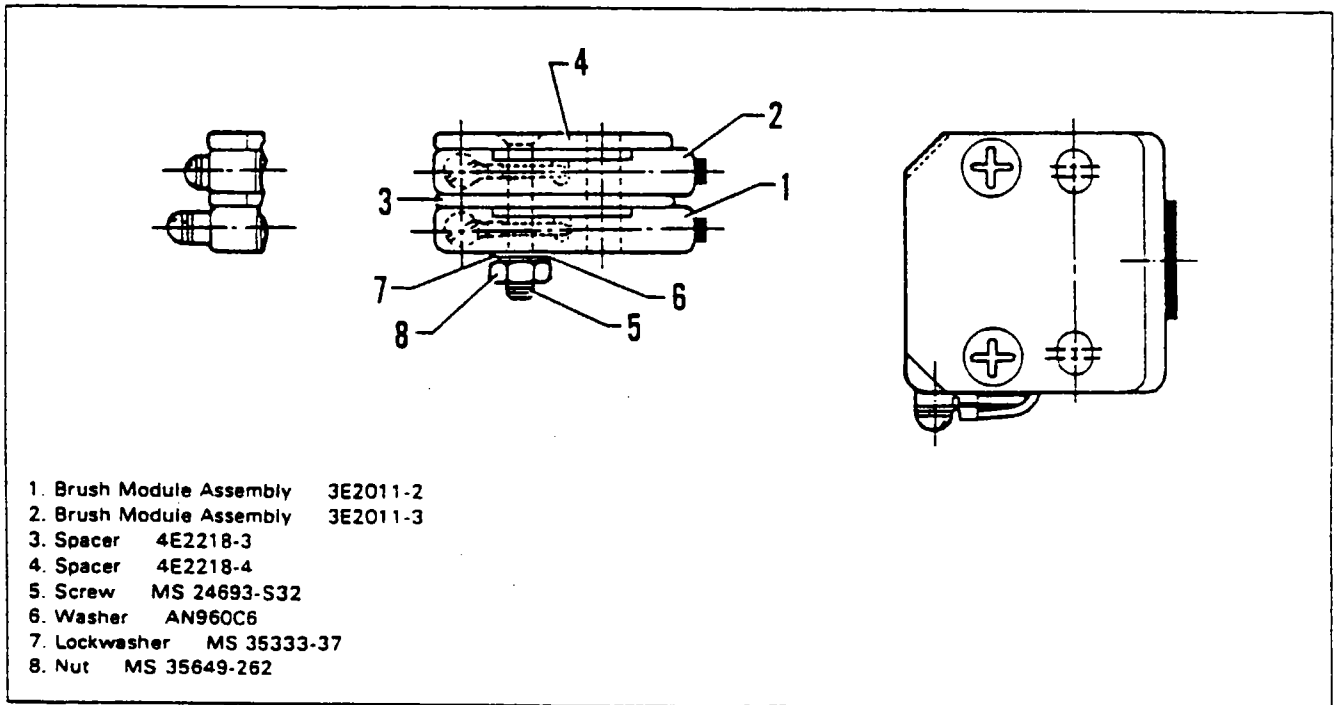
Modular Brush Assembly 3E2062-2 (3 Bladed Prop)
